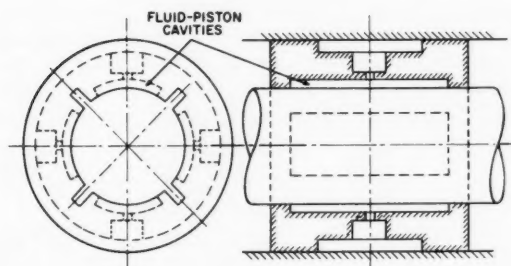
Hydrostatic support bearing of the rigid-support, hydraulic piston type. (From Allis-Chalmers Mfg. Co., Final Report 43-112, Development of Hermetically Sealed Centrifugal Pump Units for Liquid Metals, 1953.)
